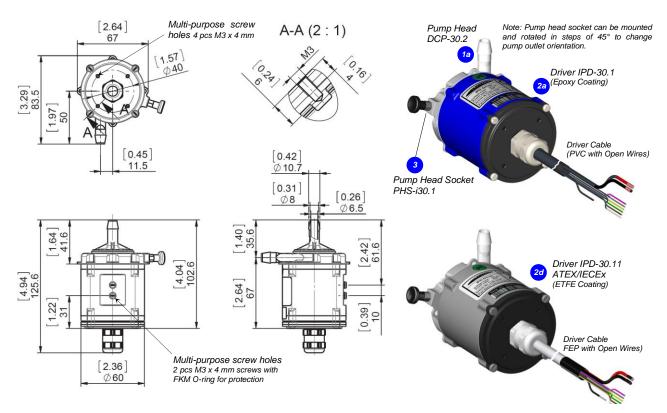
Basic dimensions (in [mm] and [inch]) of OEM model
